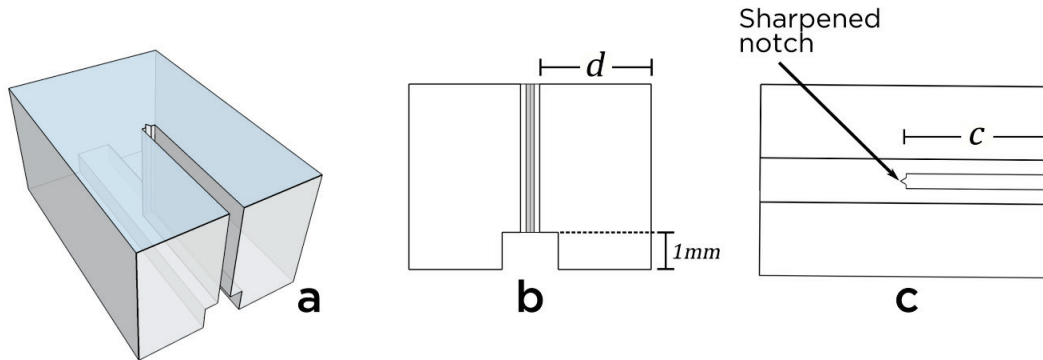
Schematic representation of samples as they were machined for DCB testing a 3D representation, b Rear view c Bottom view
